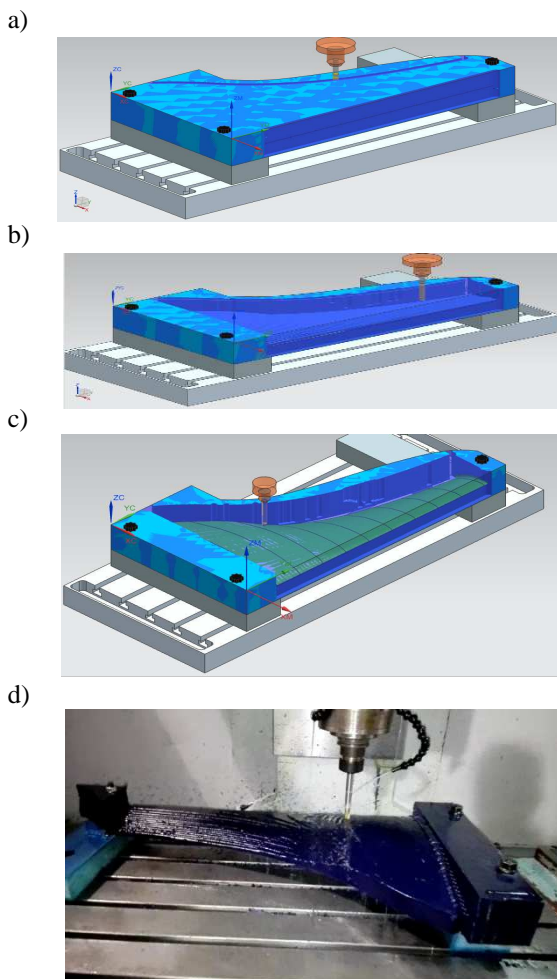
CAM software snapshots and real machining process. (a) roughing of the upper surface and blades with flat end tool (b) roughing of the blades (c) finishing of the blade with ball end tool and (d) finishing of the blades with ball end tool (real machining process).
